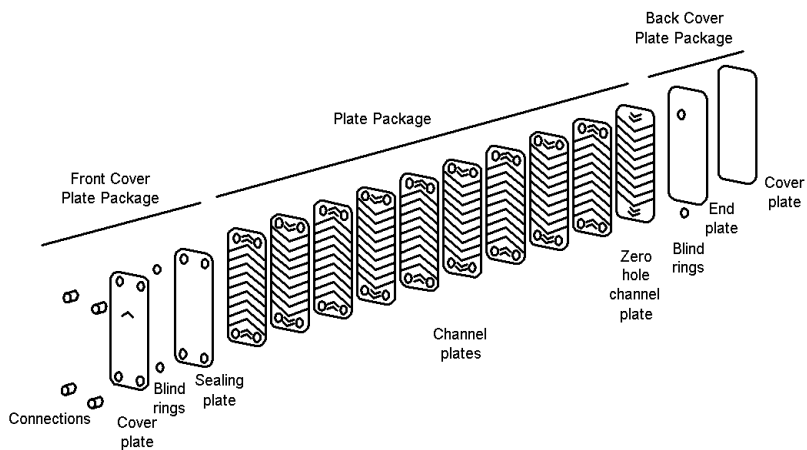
Assembly of a brazed plate heat exchanger (Adopted from SWEP International AB).
